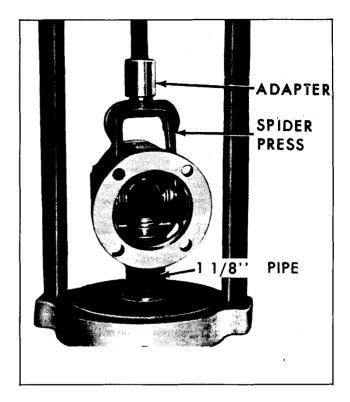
E-13 Disassembling Double Cardon Rear U-Joint
